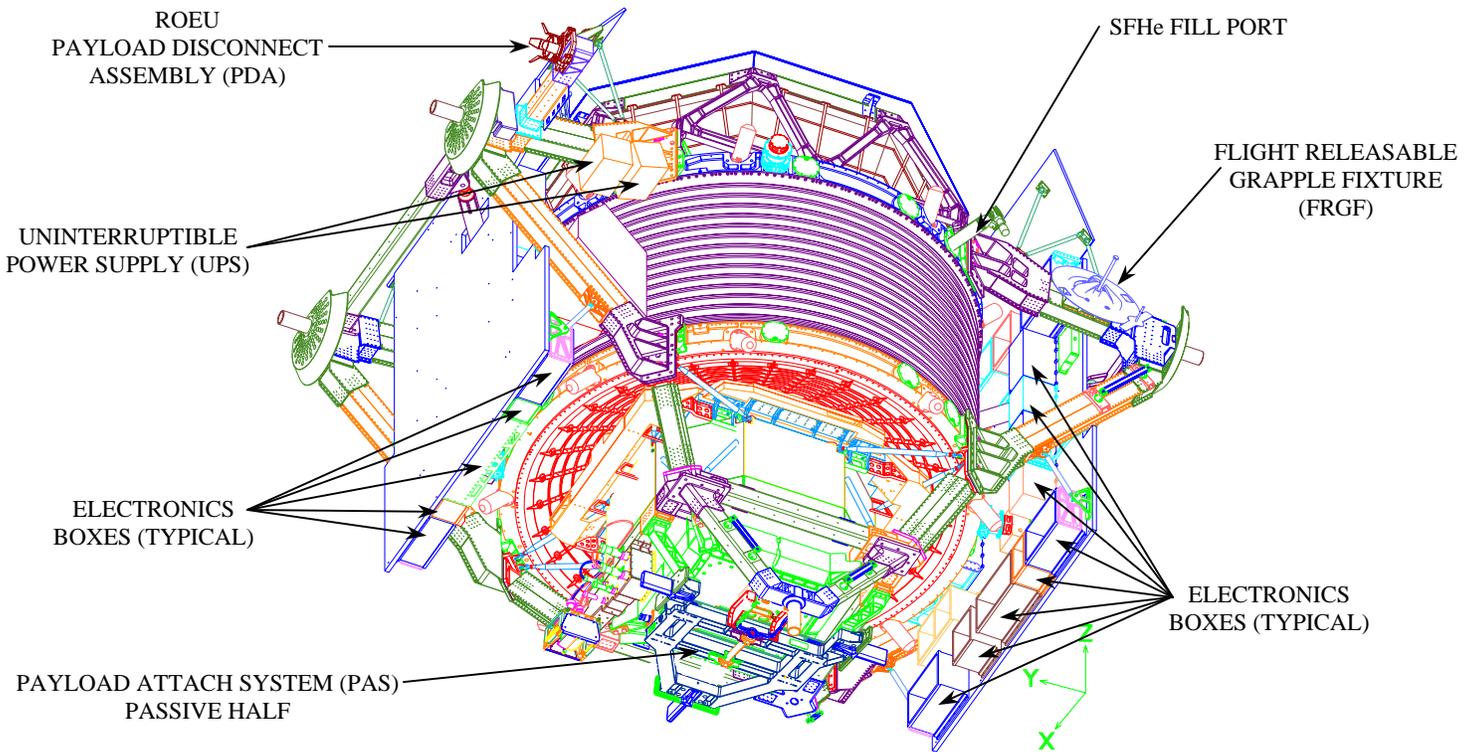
AMS-02 Payload Assembly (View 2 of 4)
